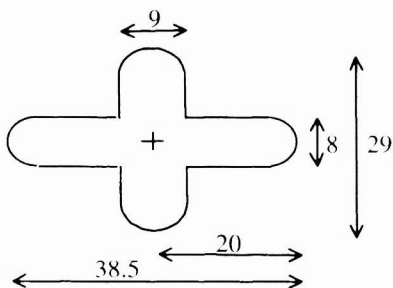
Dimensions of the intentional cross pattern defect machined 2 mm deep into the plate. All dimensions are in millimeters.
